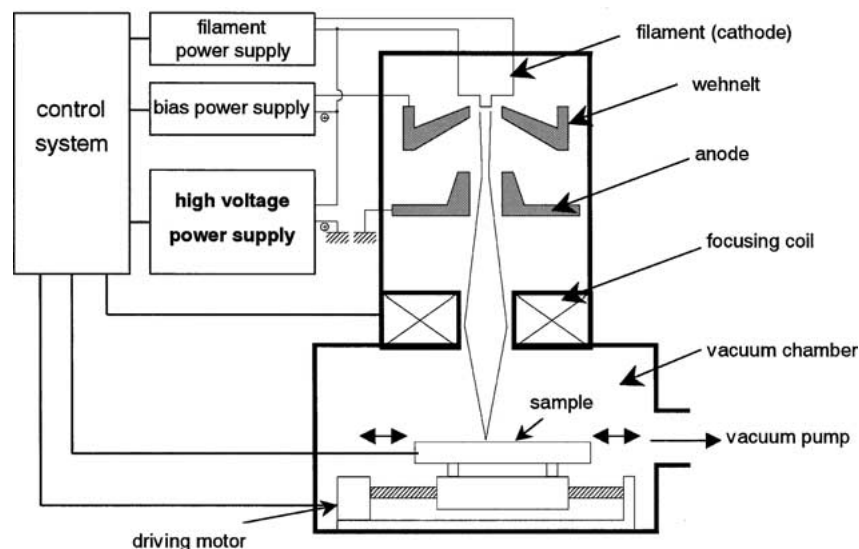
Schematic illustration of electron beam welding apparatus.
